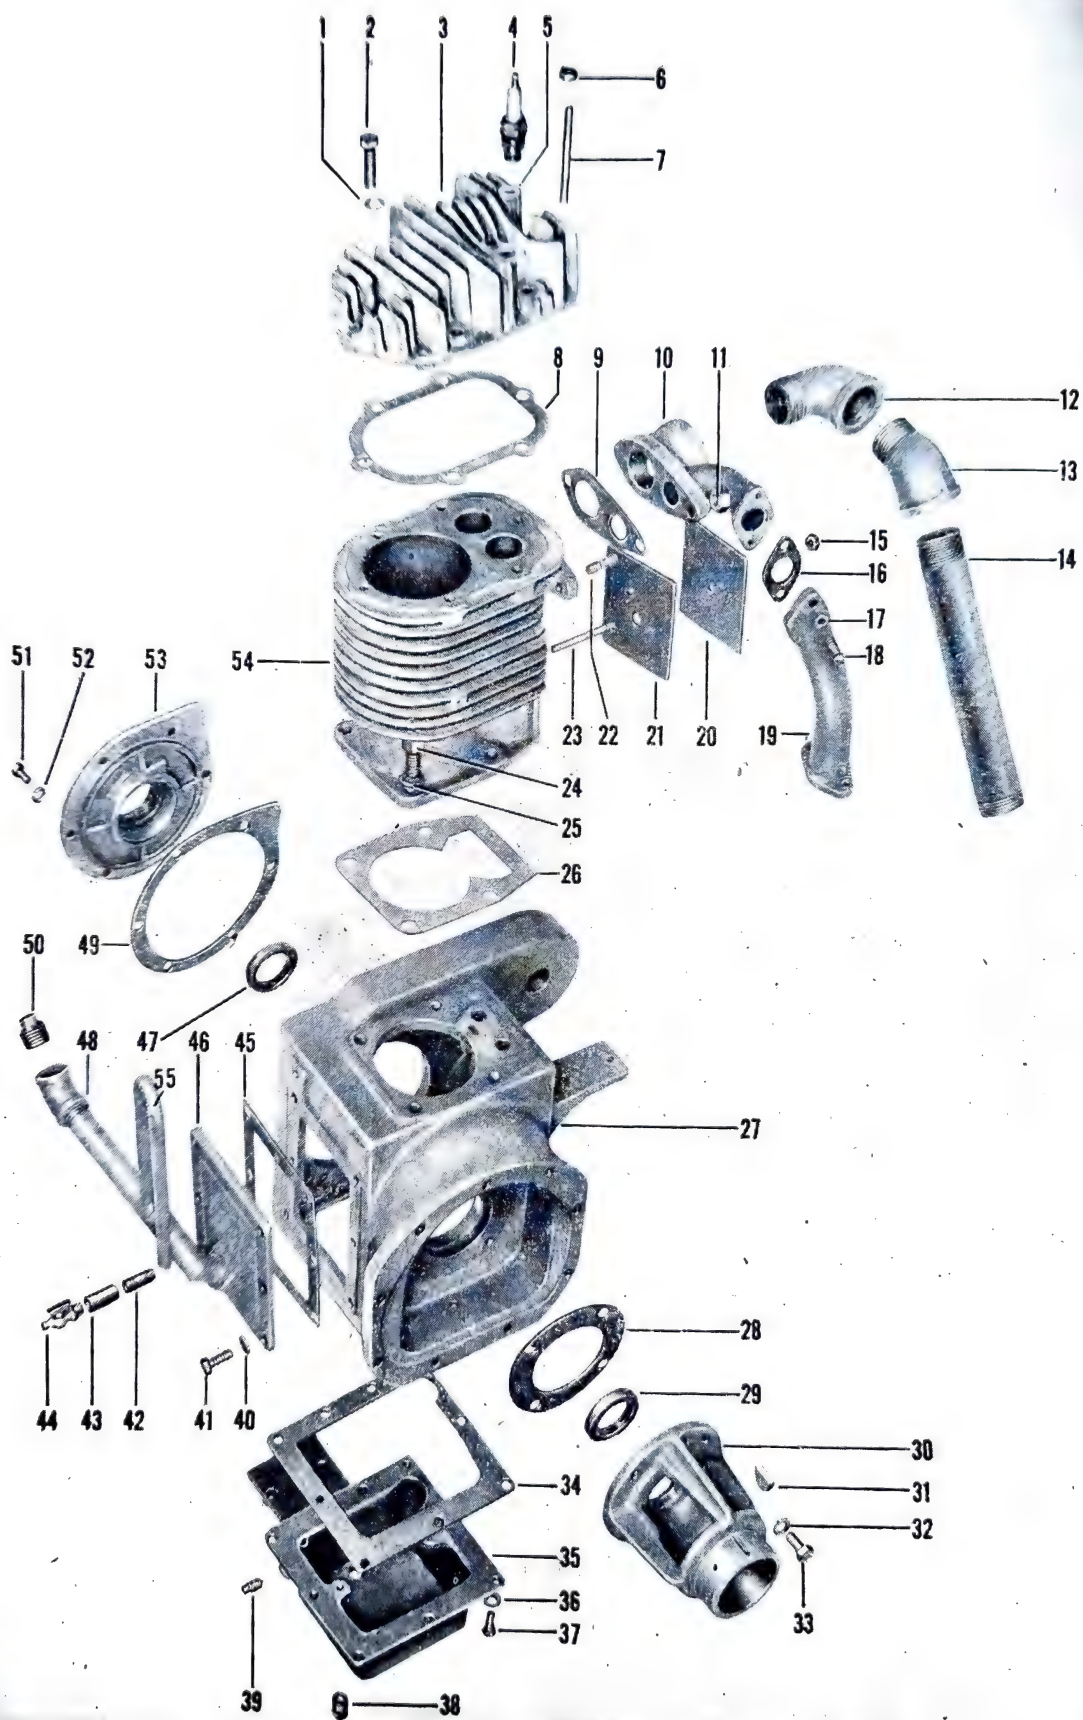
Crankcase, cylinder, cylinder head, manifolds, and oil sump.
